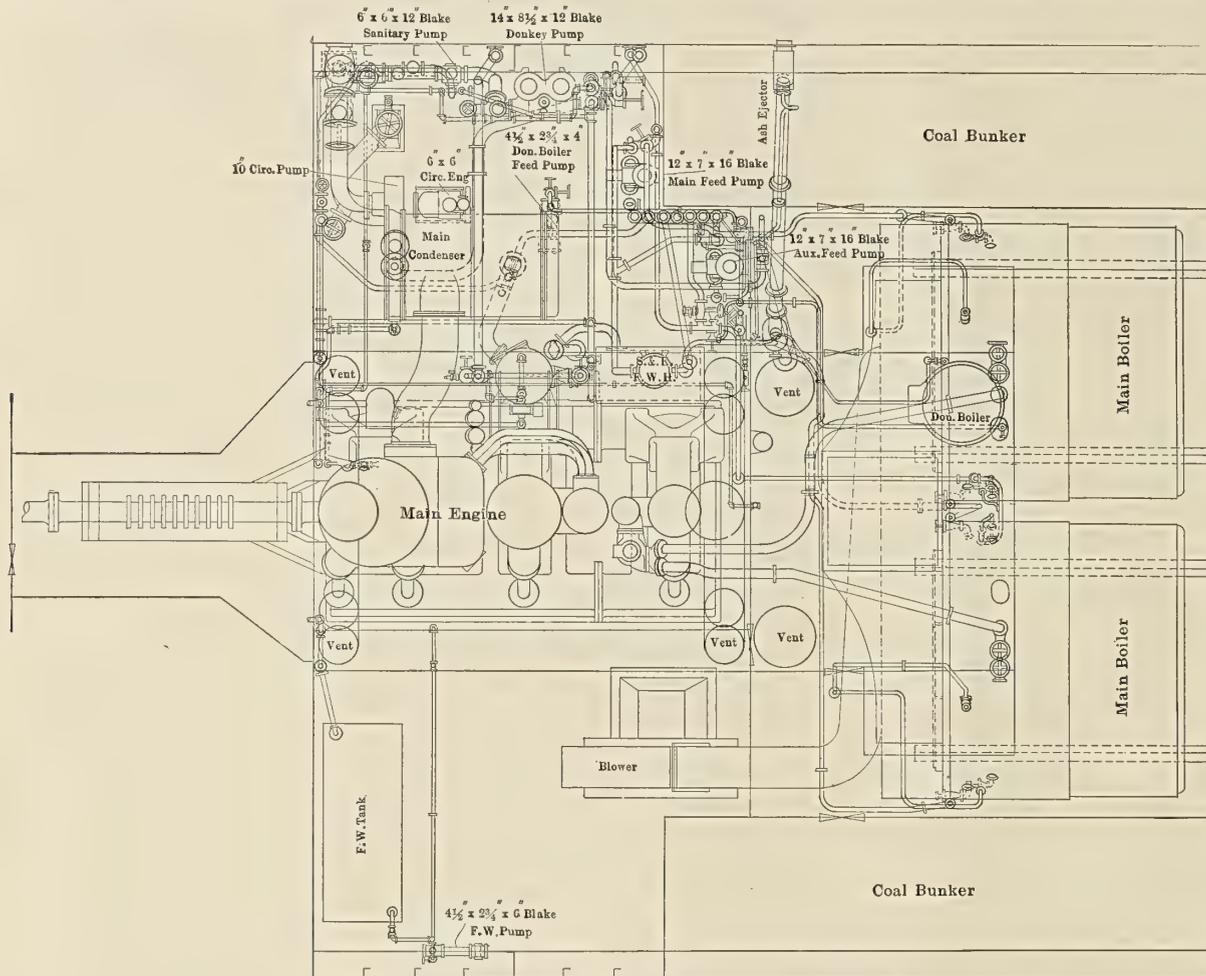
PLAN OF MACHINERY ARRANGEMENT OF THE TYLER
